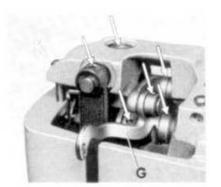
Oiling points at the front end of the machine (top and face covers removed)
